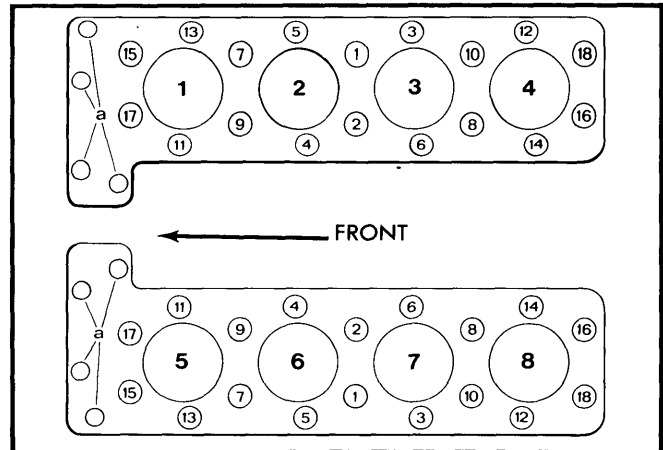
Cylinder Head Tightening Sequence (Loosen in Reverse Order)
